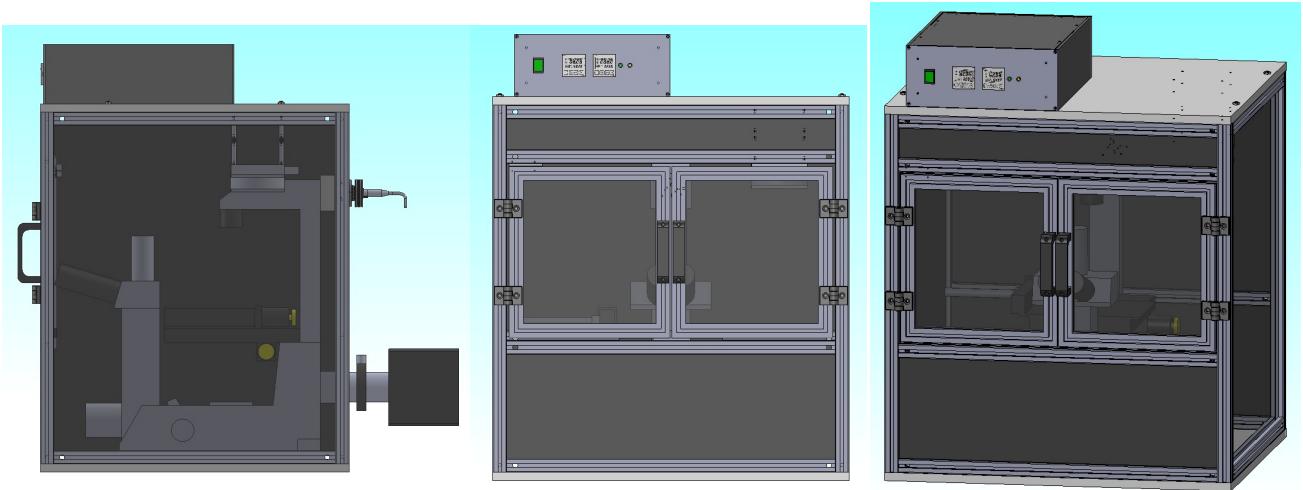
Side, front and rear views of the environmental enclosure with the control electronics. The TE300 microscope chassis is also outlined here, showing that easy access to the eyepieces is possible. The enclosure rear wall is constructed from two sections; the lower section can be modified to allow a range of access holes for cables etc.
